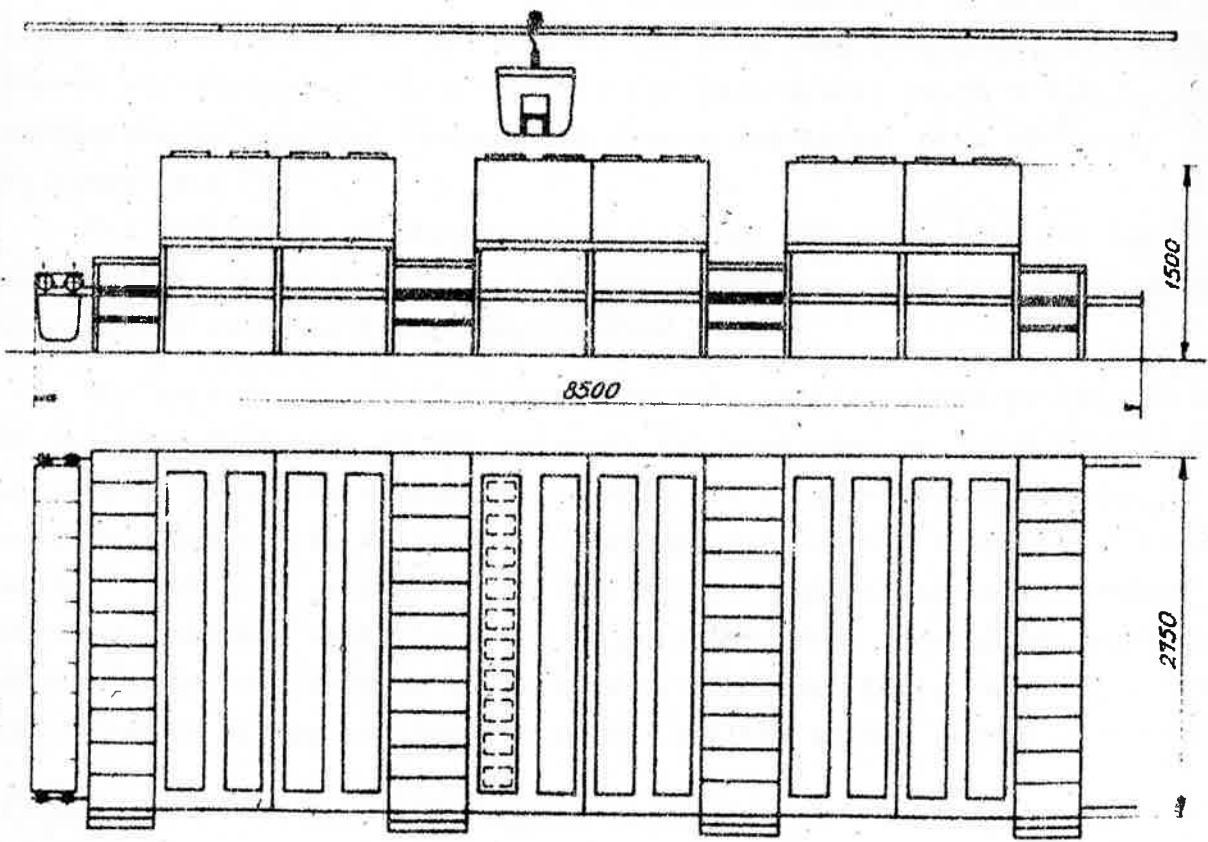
Arrangement plan of the block-freezing equipment (4,8 tons/8 hours capacity)
